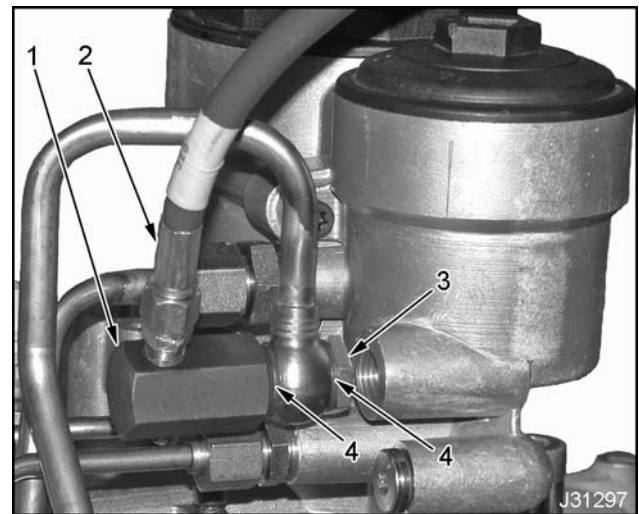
Fuel Pressure Test Adapter installed on fuel supply tube
